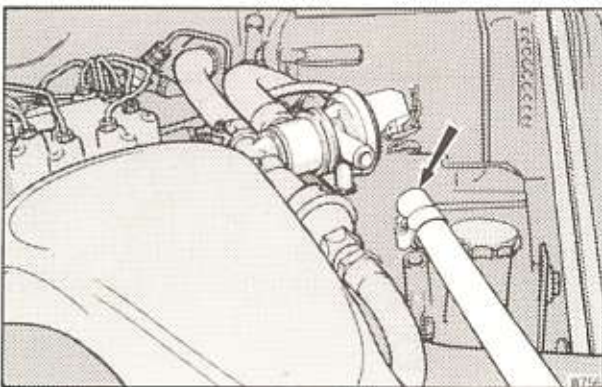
Air injection system switching valve to air cleaner hose disconnected for leak check
